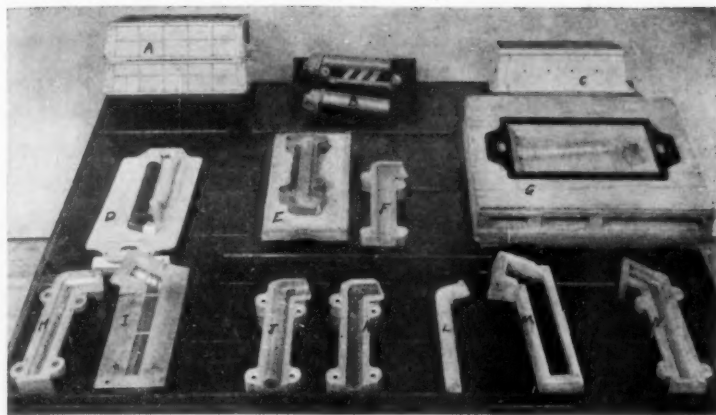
VARIOUS PIECES OF PATTERN EQUIPMENT USED IN MAKING A SMALL AIR CLEANER PIPE. (A) SLIP FLASK. (B) AIR CLEANER PIPE CASTING. (C) SLIP JACKET. (D) PATTERN PLATE. (E) FOLLOW BOARD AND METAL PATTERN FOR MAKING ALUMINUM CORE DRYERS. (F) ONE HALF OF MASTER PATTERN FOR CORE DRYER. (G) MASTER PATTERN IN FOLLOW BOARD USED IN PRODUCING PATTERN PLATE. (H) ONE-HALF OF METAL CORE BOX. (I) KNITTING FRAME ON CORE BOX. (J)-(K) FINISHED ALUMINUM CORE DRYER. (L) CORE FOR CASTING. (M) BEDDING FRAME. (N) MASTER PATTERN FOR ONE-HALF OF CORE BOX.
